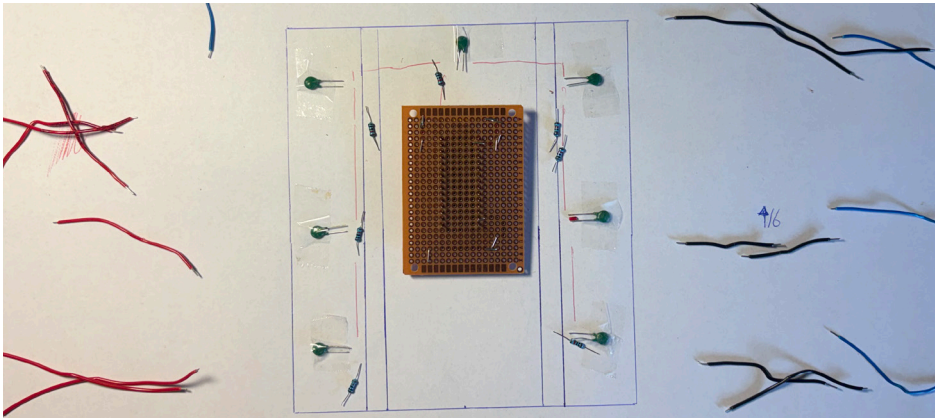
Based on the sketch in Figure 64, laying out all sensors for soldering
